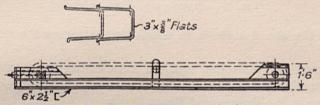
ARRANGEMENT OF U-LINK CONVEYOR.
